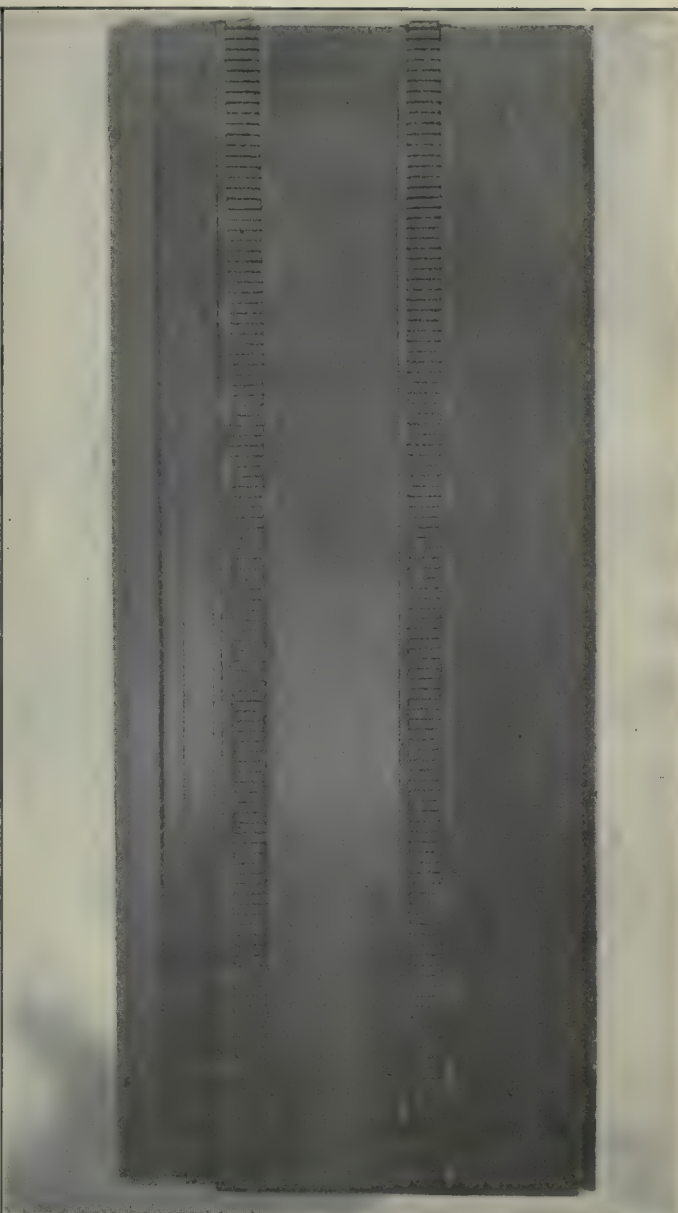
INNER SIDE, AFTER WELDING
